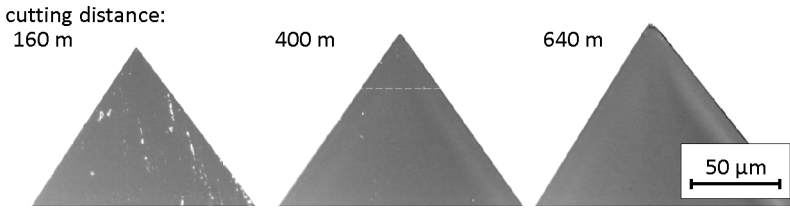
Flank faces of diamond tools after cutting distances of 160 m (left), 400 m (center) and 640 m (right)
